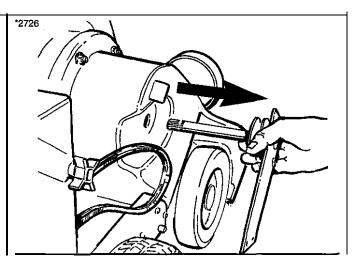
Pull Drive Pulley Bearing Plate Assembly Out Of Vacuum Nozzle Housing
